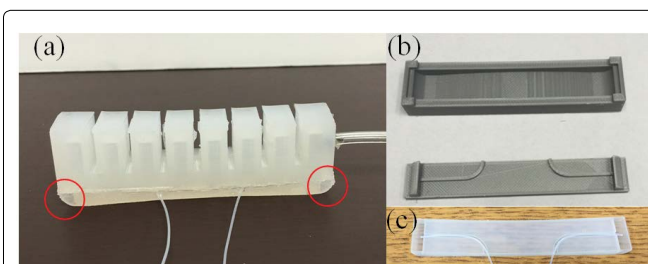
a) Inchworm robot with deformable legs (in the two red circles); b) Pictures of the 3D printed molds for fabricating the robot bottom layer; c) Picture of the fabricated robot bottom layer with two deformable legs. The air cavity inside each deformable leg is connected to a flexible plastic tube for pneumatic control of the pressure.
